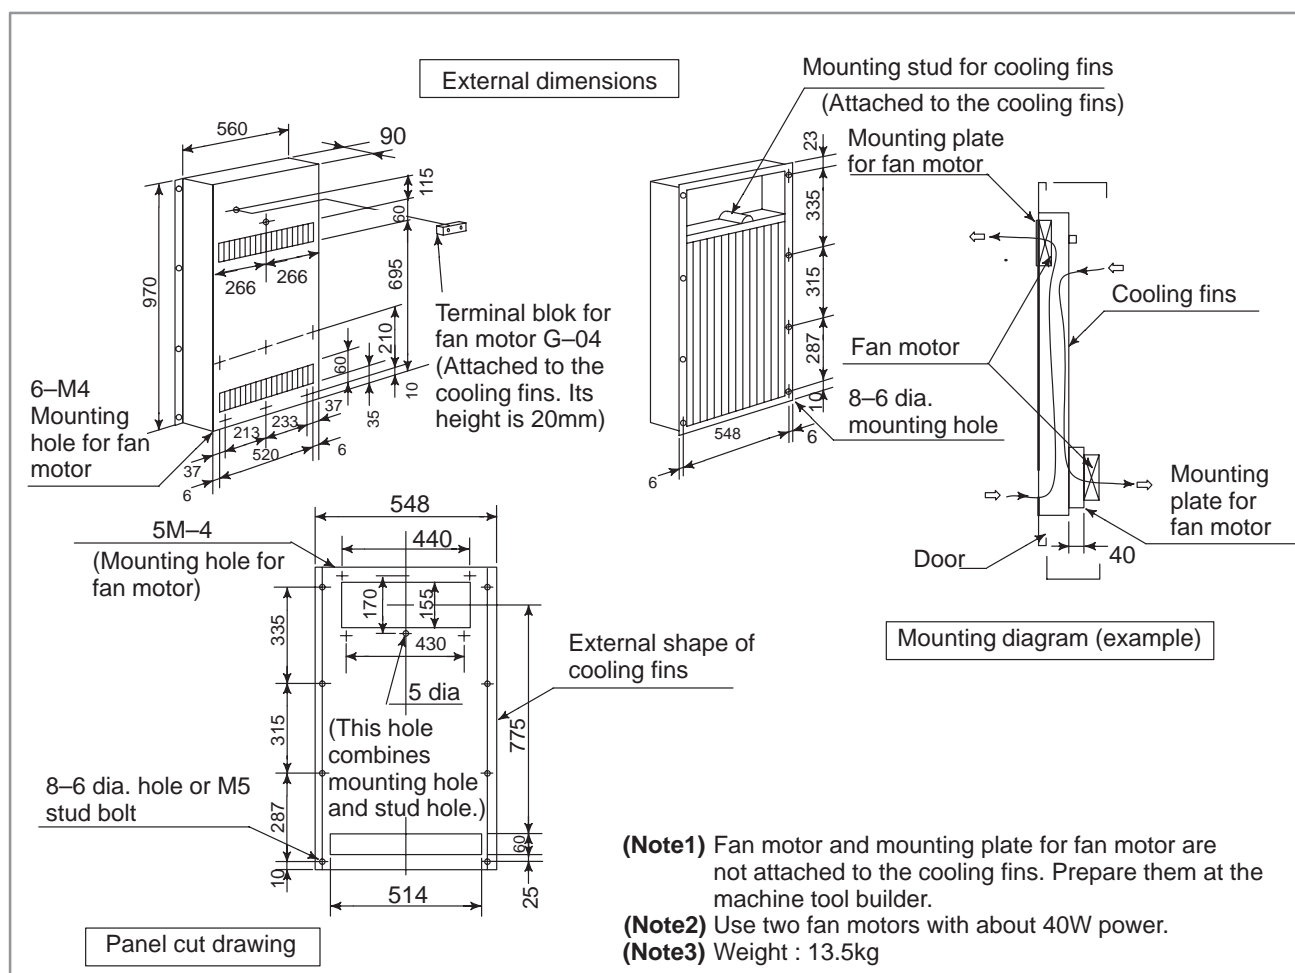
(d) External dimension and mounting method of cooling fin C (A02B-0053-K305)
